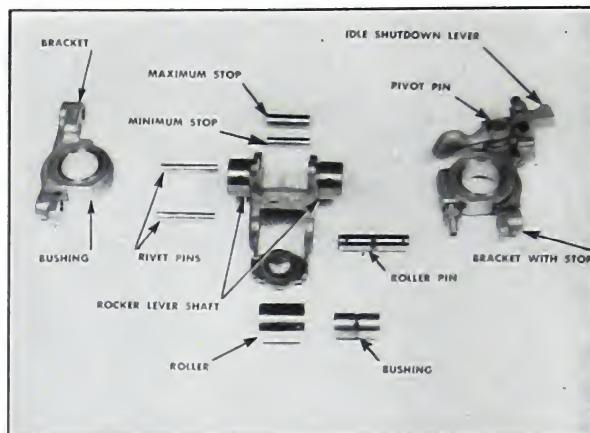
Exploded view cam rocked lever assembly requires special jigs and line-boring equipment. Fig. 5-239.
